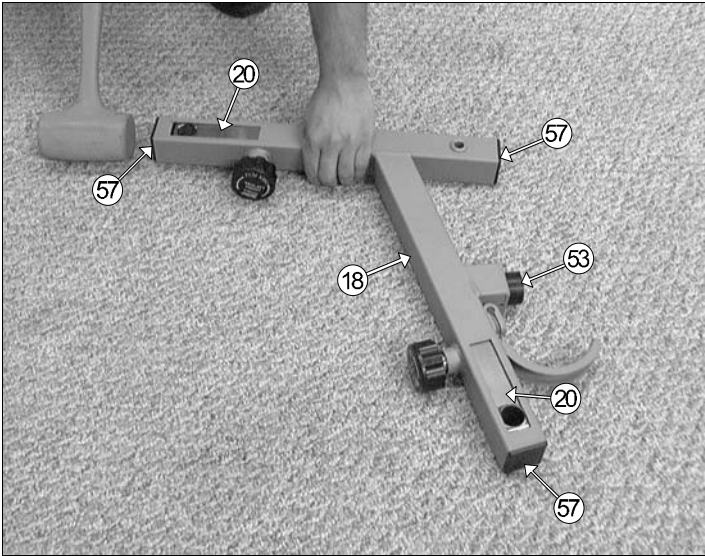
Using a rubber mallet, insert three Plastic Insert Caps 1 3/4" Sq. (#57) into the tube-ends of the Leg Extension Arm (#18). Next, attach the Rubber Bumper 3/8 X 1 1/2 (#53) to the Leg Extension Arm (#18) using one Hex Head Cap Screw 3/8-16 X 1 1/4 (#76).
